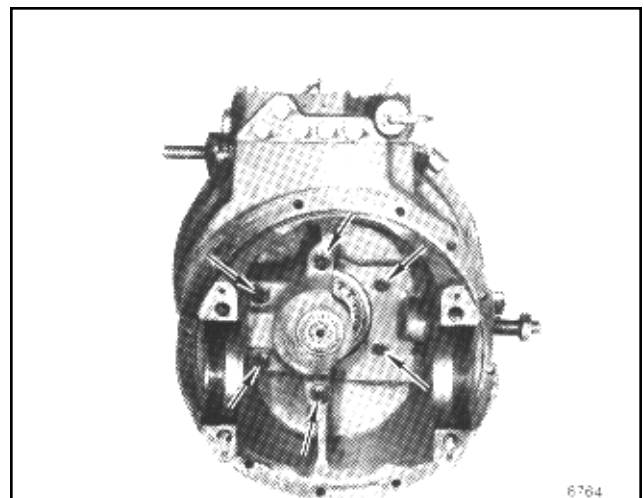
CAPSCREWS FOR THE PINION BEARING CARRIER
